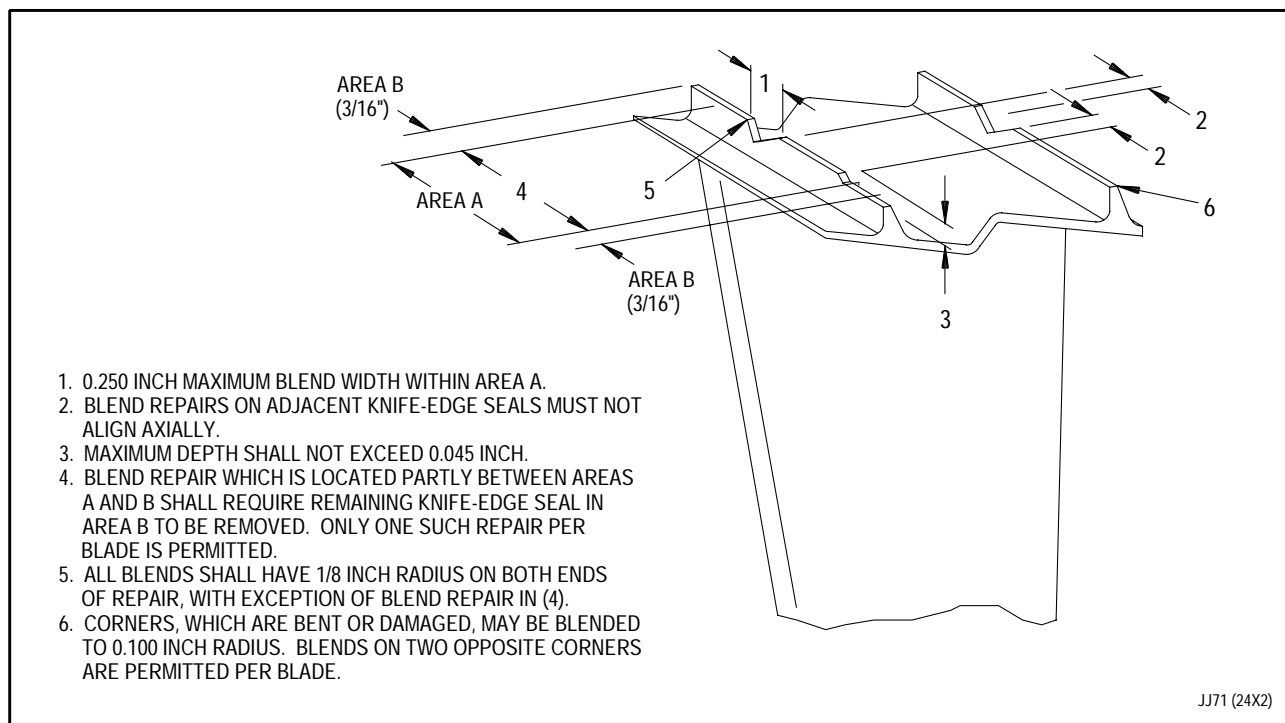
Third Stage Turbine Rotor Blades - Knife-edge Seals Blend Repair
